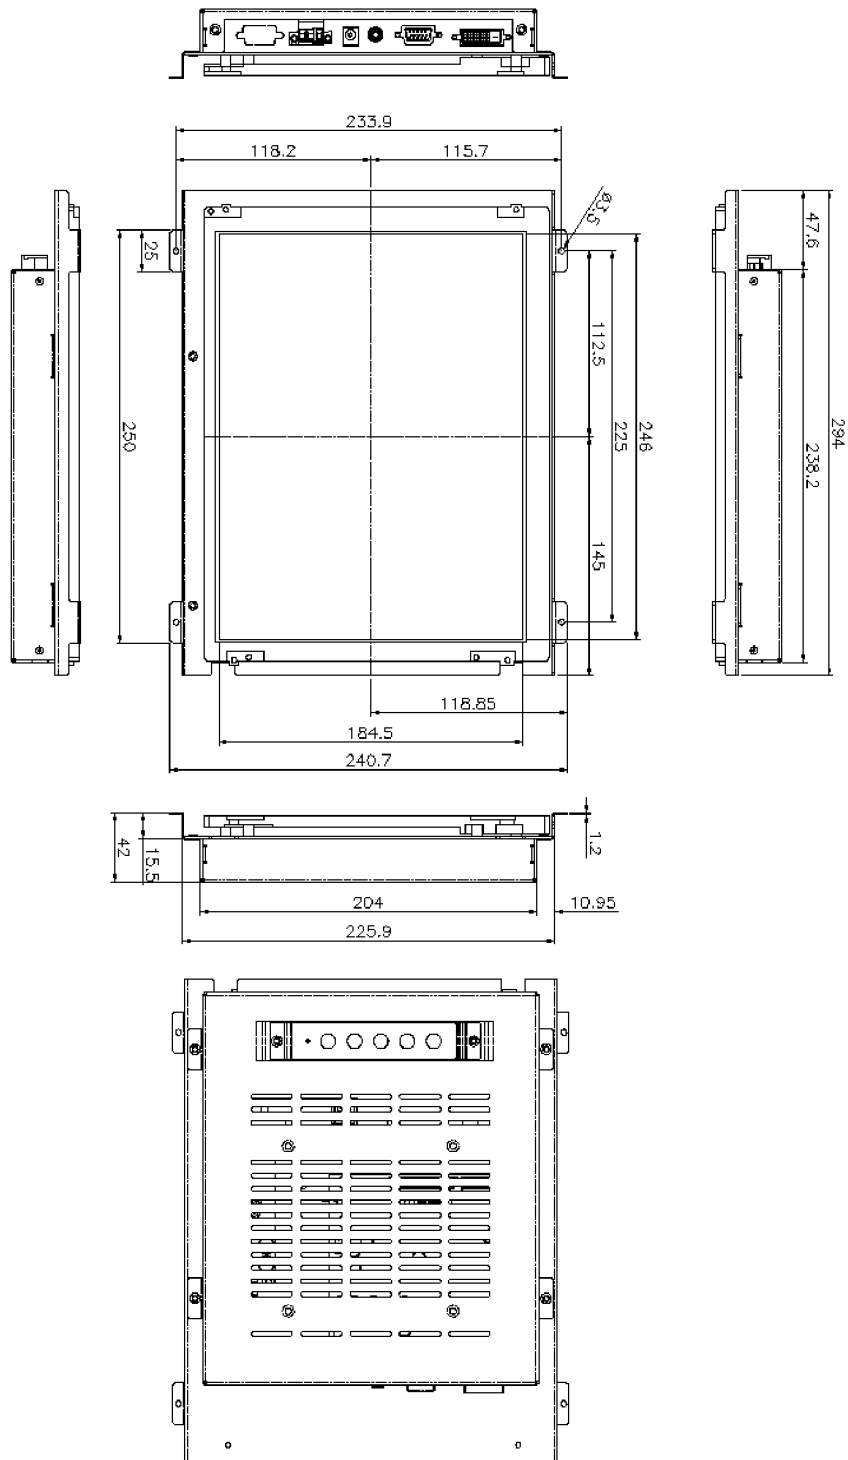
2007604 Physical Dimensions (millimeters)
